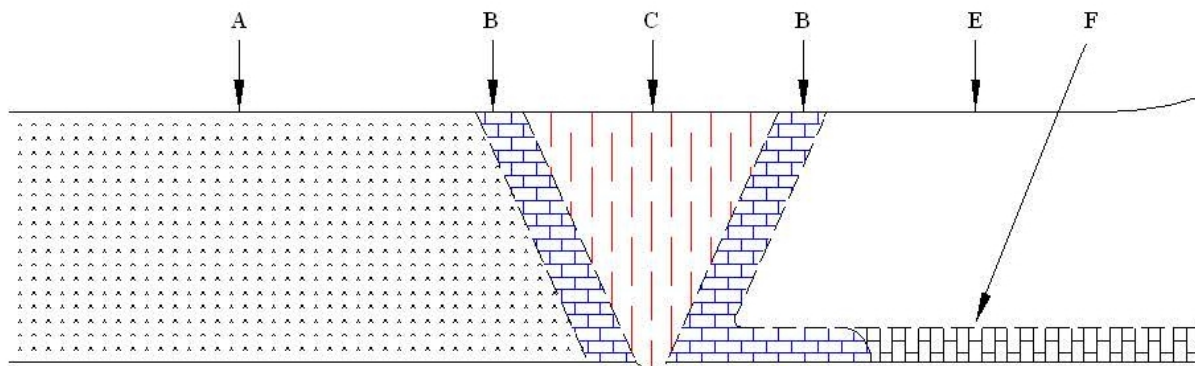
Typical BWR recirculation outlet nozzle, nozzle butter, weld, and safe end.
